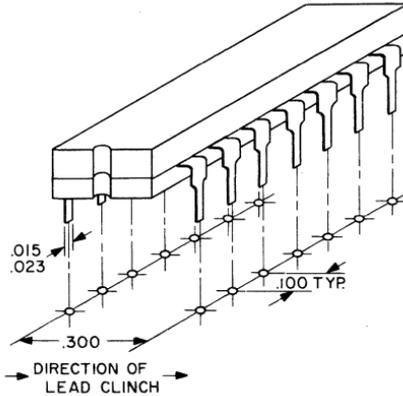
Mounting arrangement for RCA dual-in-line packages.
